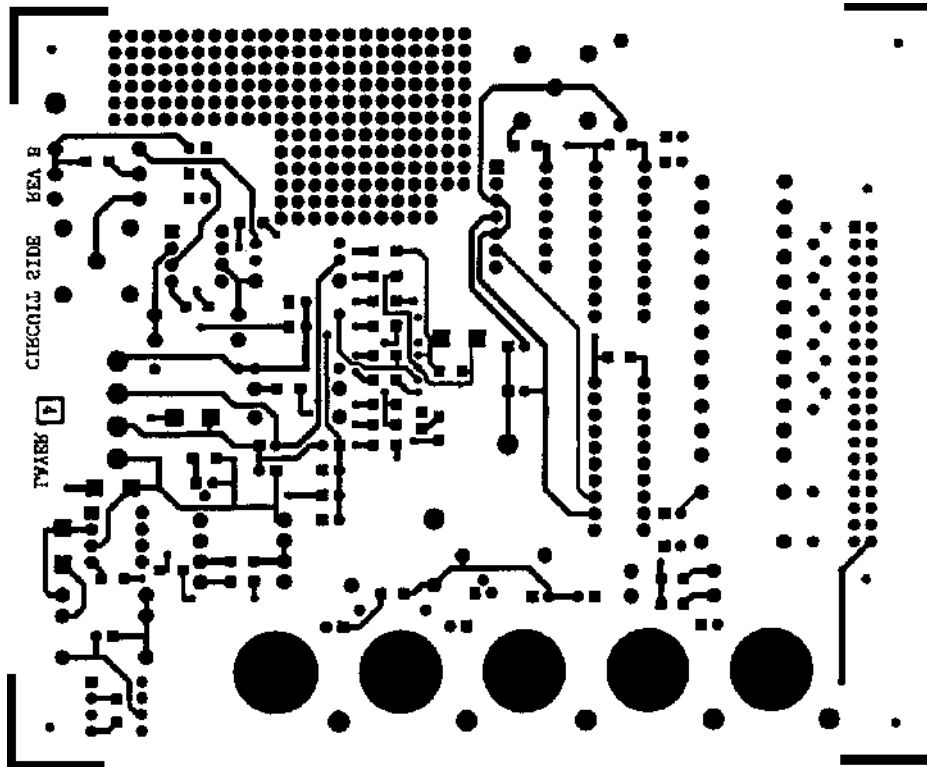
Evaluation Board Solder Side Layout (Not to Scale)
